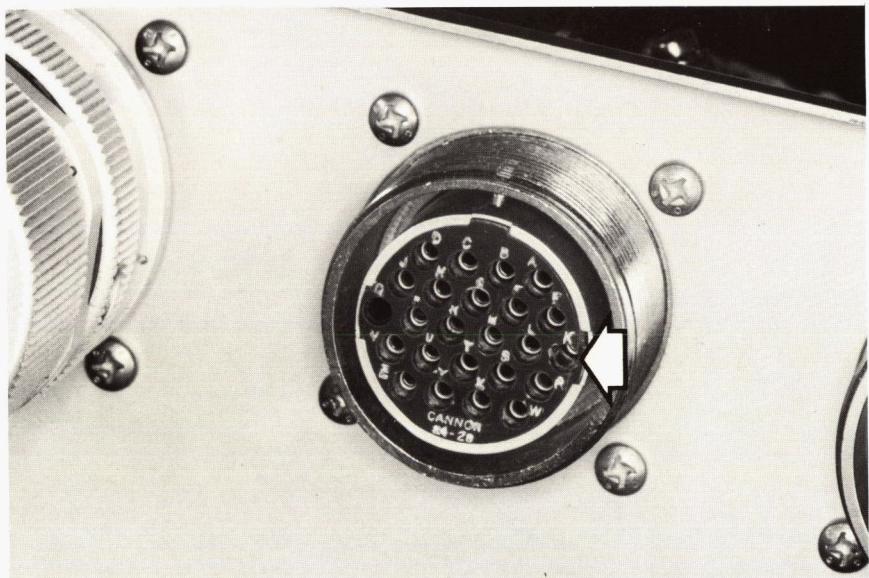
Although the pin sockets of this connector are properly identified, notice that socket "K" is damaged.
